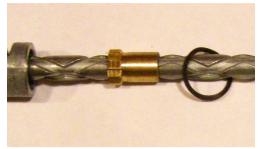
THREAD OF A YANKEE SCREWDRIVER ROD
